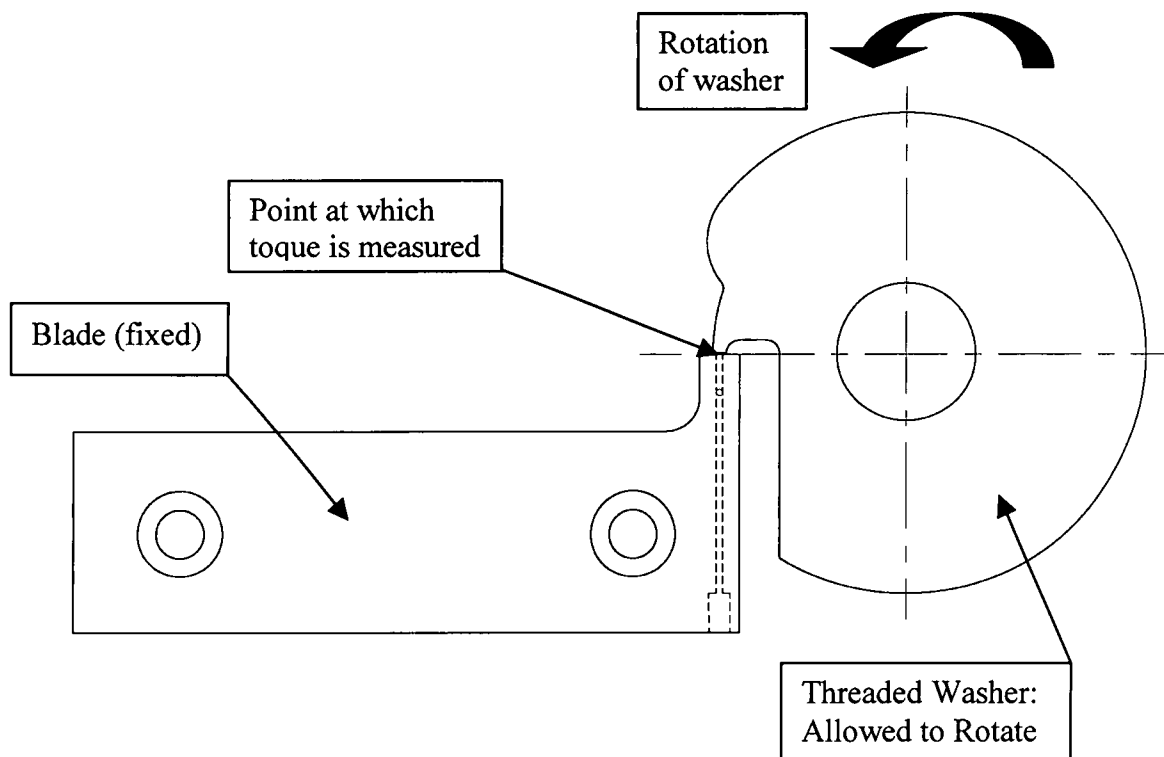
Blade and the threaded washer indicating how thread torque is generated.
